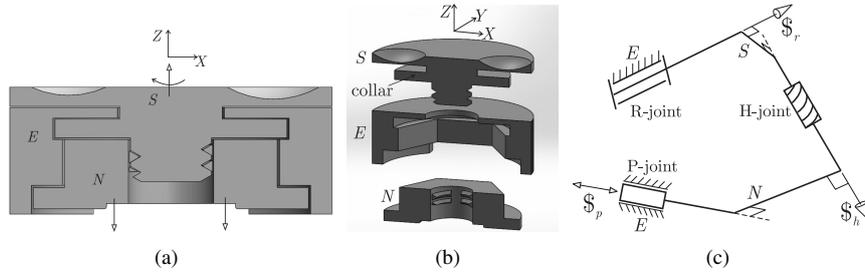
Articulated mechanism in the crown. (a) cross-sectional view, (b) exploded view, (c) general kinematic diagram of the mechanism.
